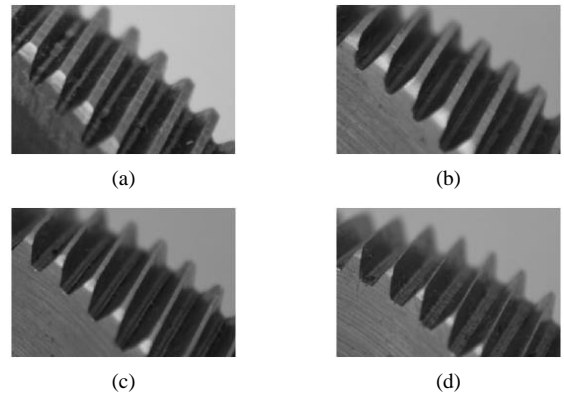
Set of analysed gears: (a) healthy gear, and uniform wear on the gear teeth (b) 25%, (c) 50% and (d) 75%, respectively.
